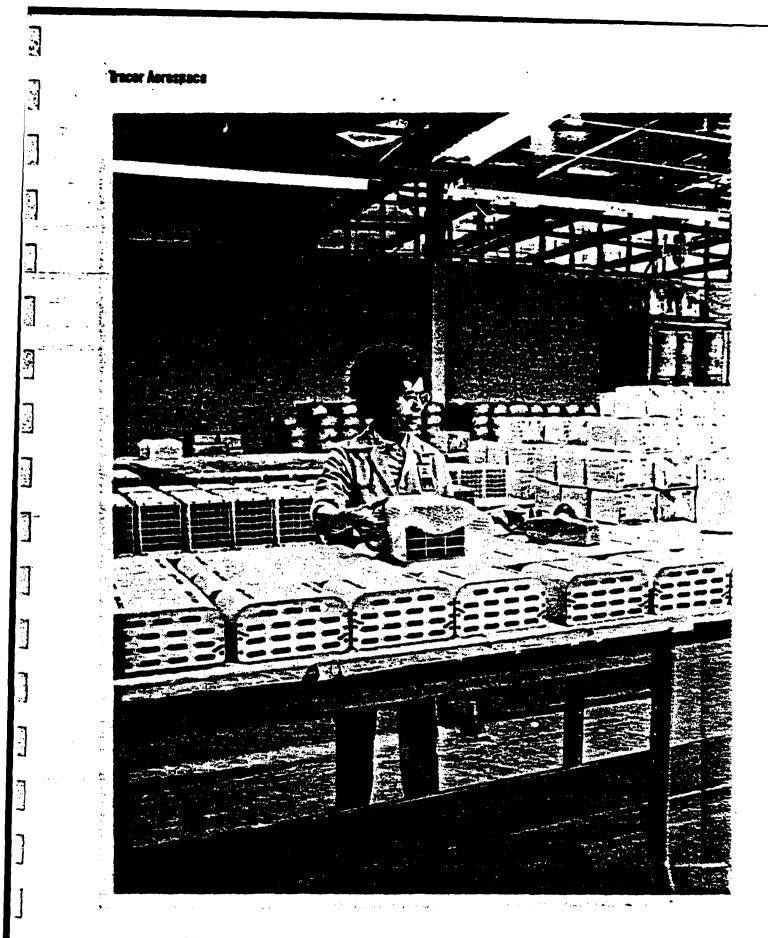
ASSEMBLY AND WRAPPING OF BLOCKS
